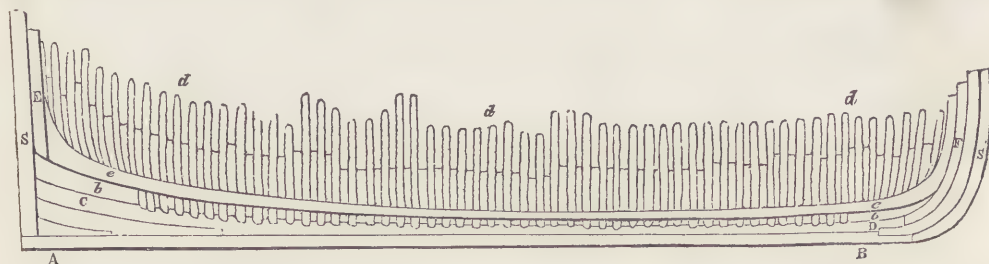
ELEVATION OF SHIP'S TIMBERS.
